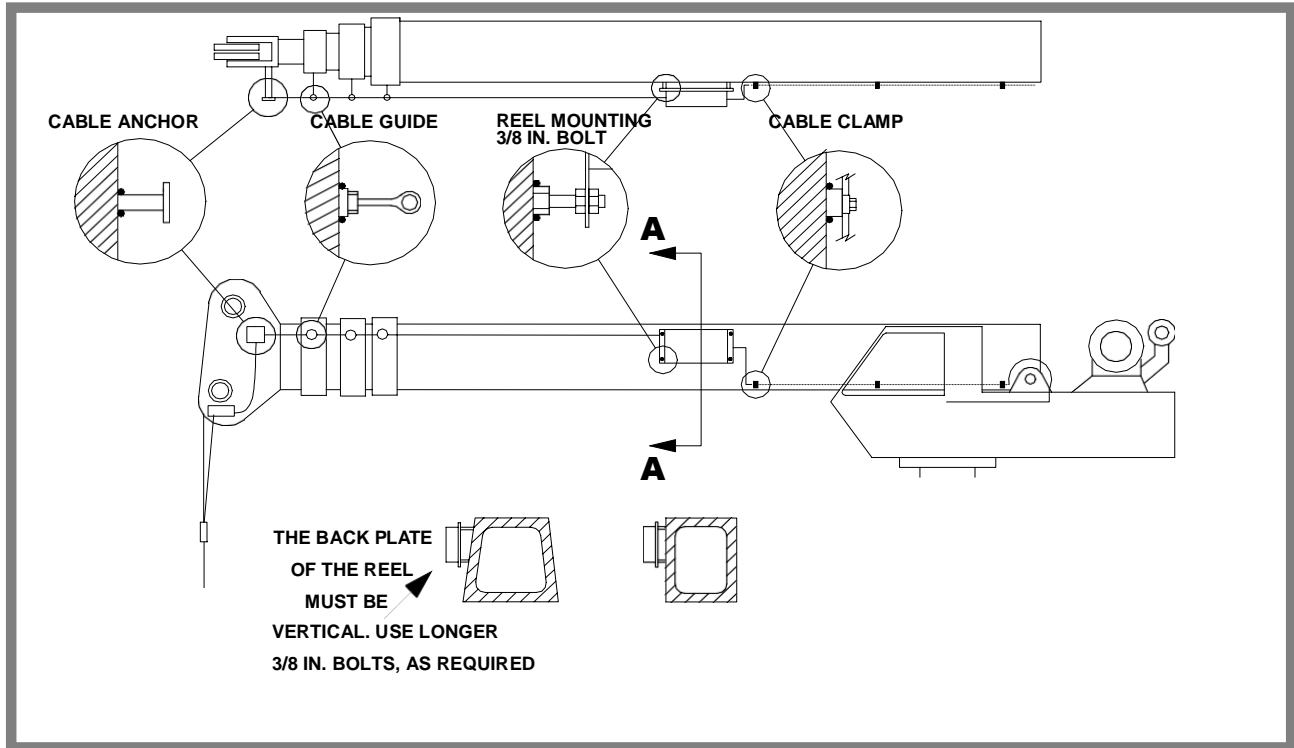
EXTENSION REEL (HYDRAULIC)
